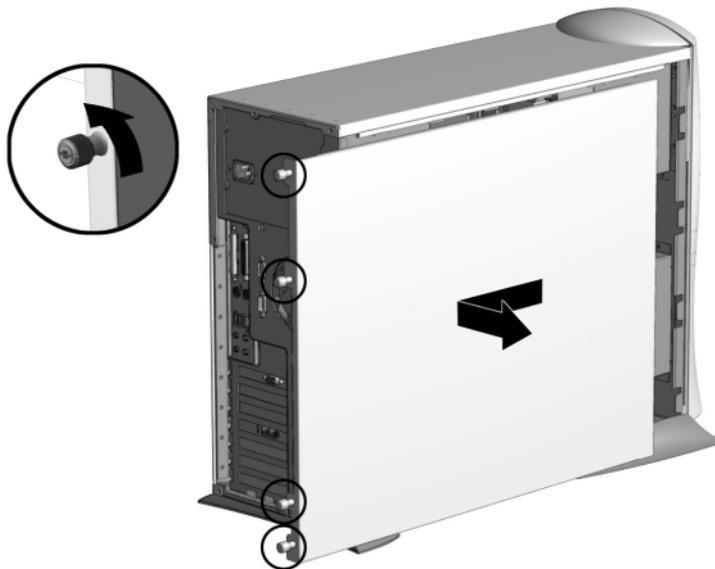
Loosening the thumbscrews and removing the side access panel
